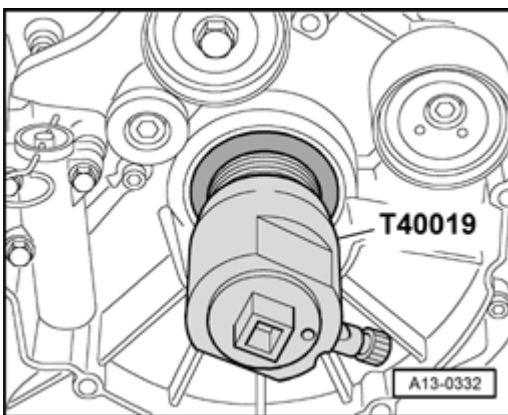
Positioning And With Forced Pressure Bolt Into Oil Seal
